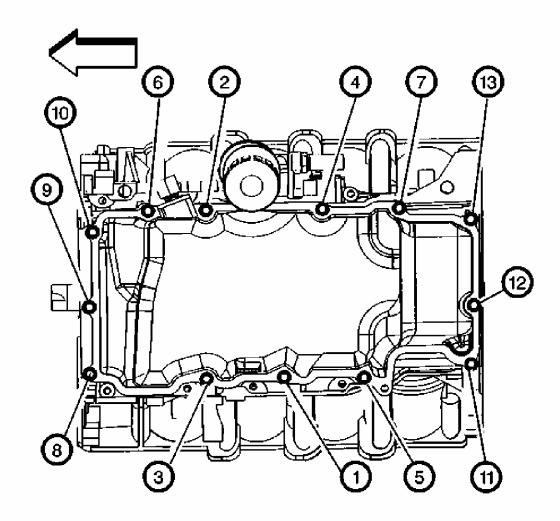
Identifying Oil Pan Bolts Tightening Sequence Courtesy of GENERAL MOTORS CORP.
